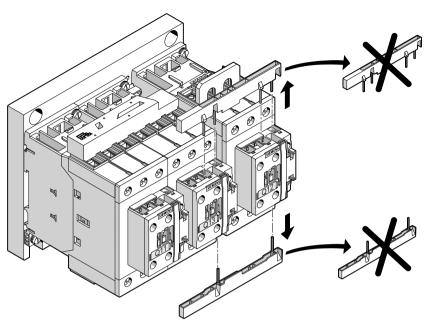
Removal of the wiring modules for connecting the control current paths on a contactor assembly for star-delta (wye-delta) start with screw-type connections of size S2
